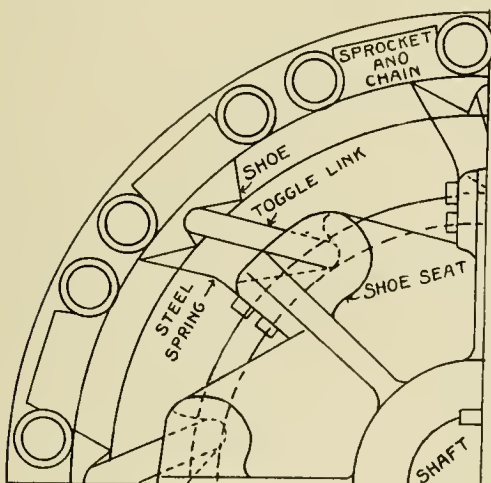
MAIN SHAFT OF GERLACH WAVE MOTOR, SHOWING SPROCKET WHEEL AND TOGGLE CLIPS.
